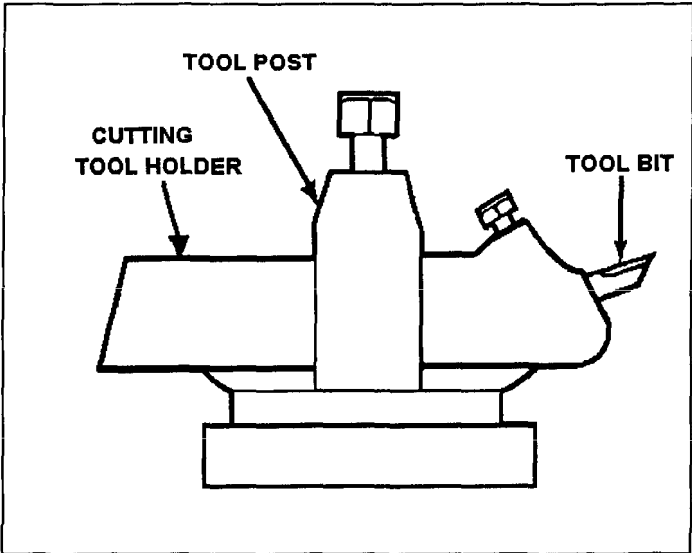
Tool holder with tool bit mounted in a tool post.
